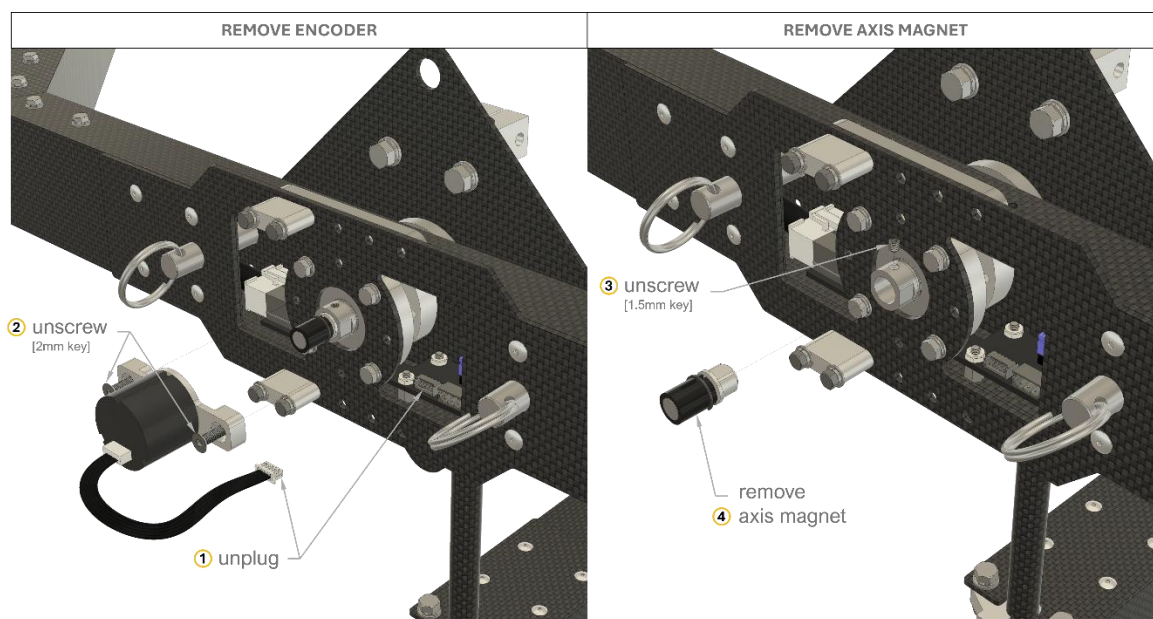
Prepare for motor installation: Steps to remove the encoder.
